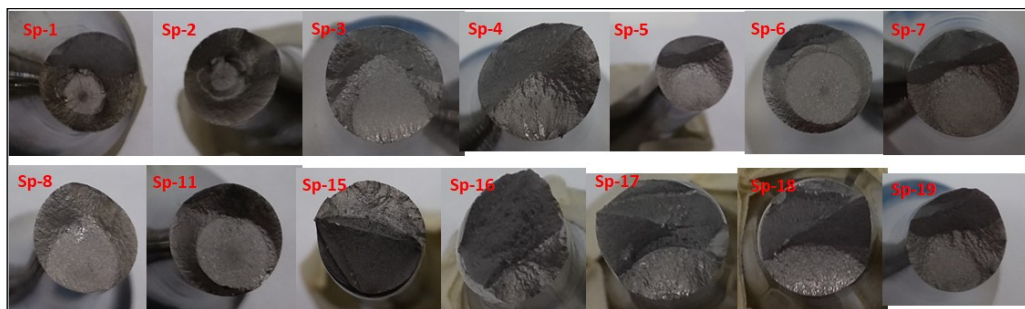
Optical image for fracture surface of group -1 failed specimens.
